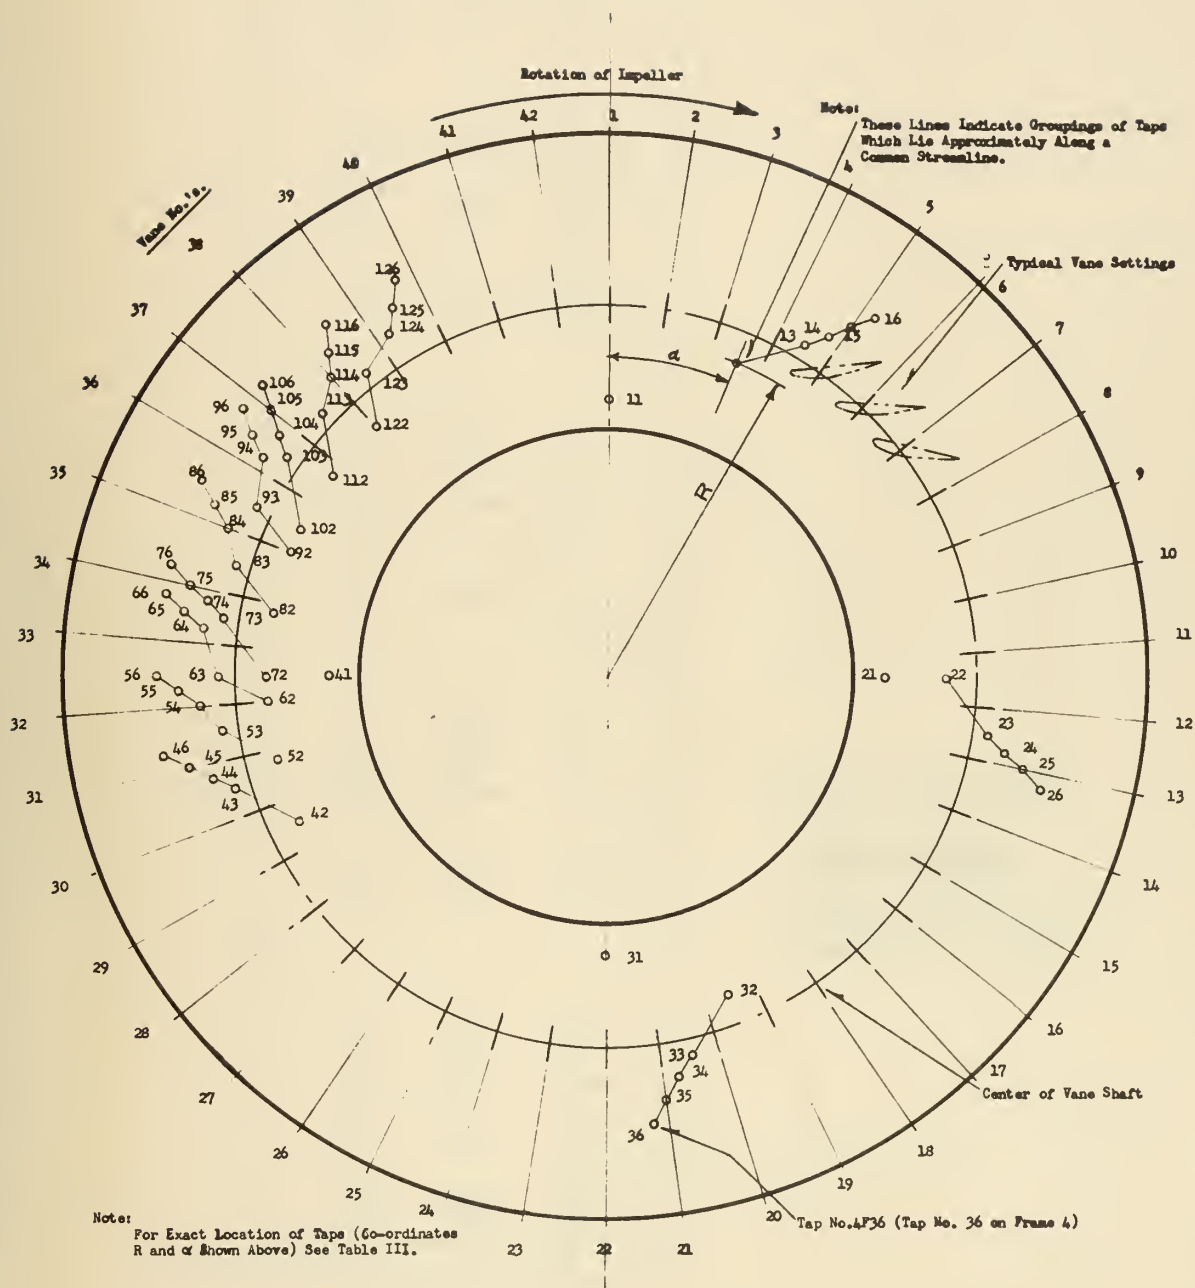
WALL PRESSURE TAPS AT FRAME NO. 4
